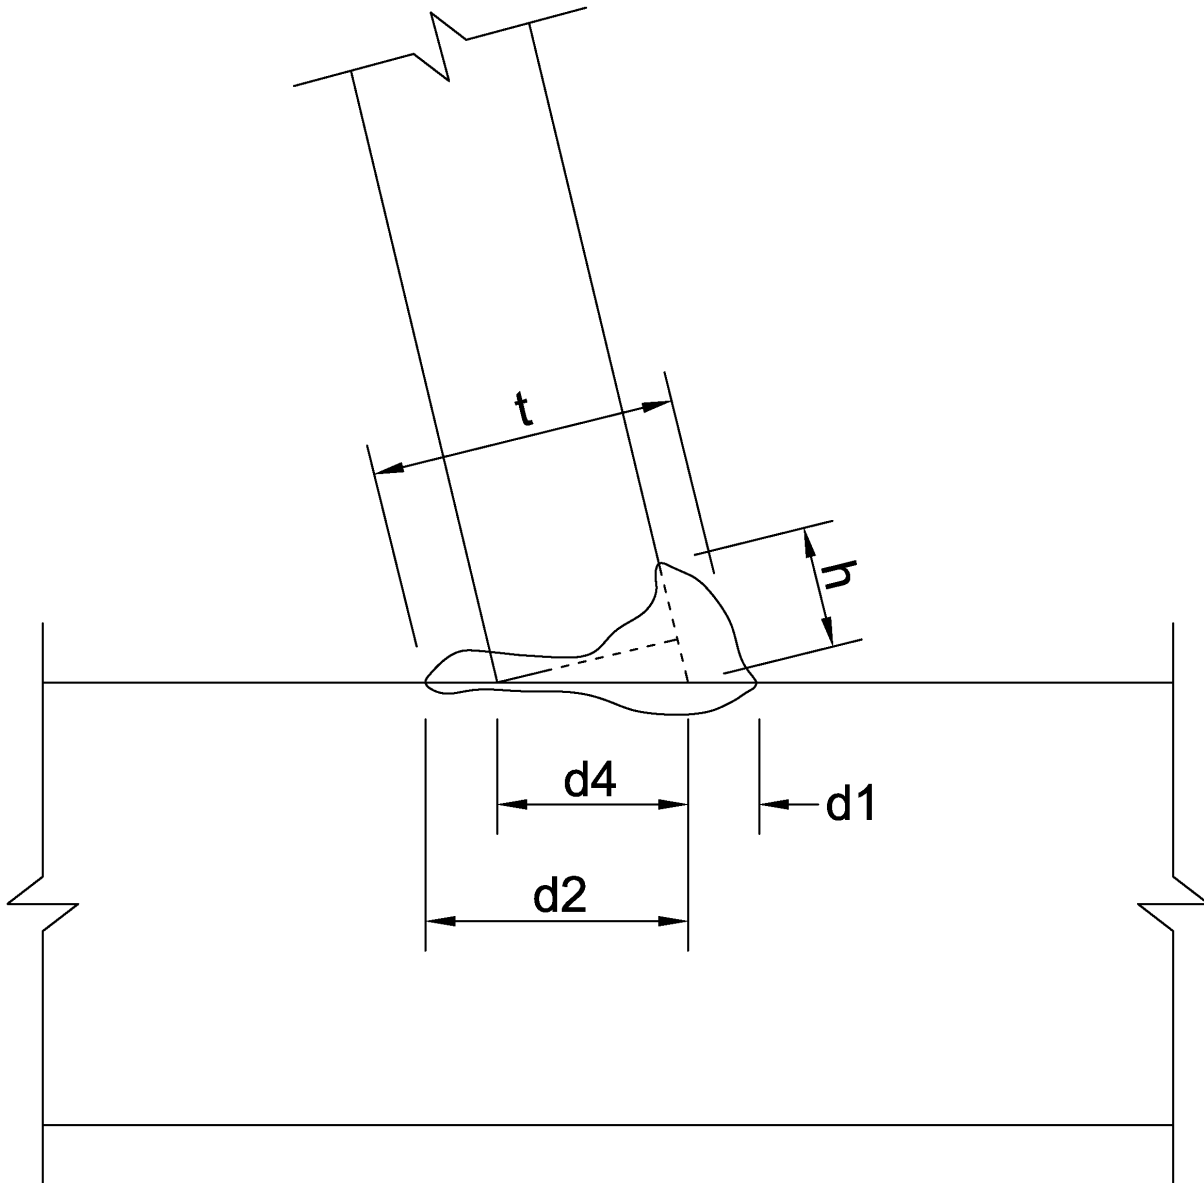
Schematic. Measured dimensions for laser panel specimens.
